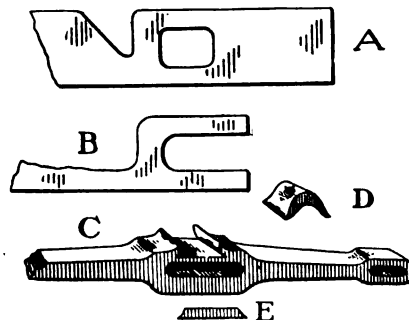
A B—FORGING JAW FROM ONE PIECE. C—REINFORCING FULCRUM HOLE OF A SPRING EQUALIZER.
